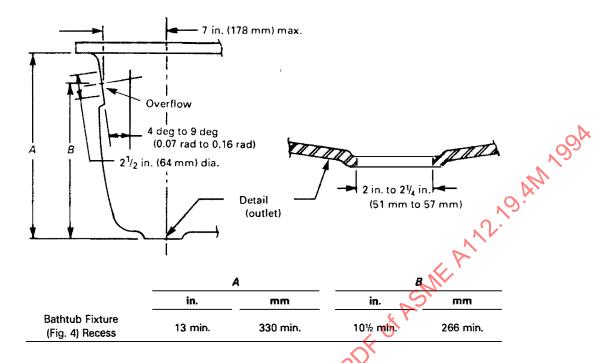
BATHTUB OUTLET AND OVERFLOW DIMENSIONS
